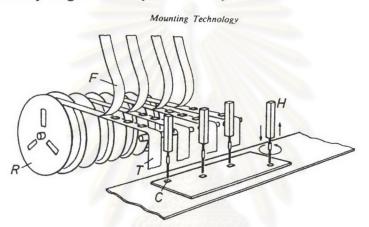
Drawing of a method for automatic placement of leadless components on a printed board. The vacuum pipettes, H, can be displaced horizontally and vertically. R is reel; T is tape with leadless components, C, which can be picked up after stripping off the plastic cover strips, F.⁹
